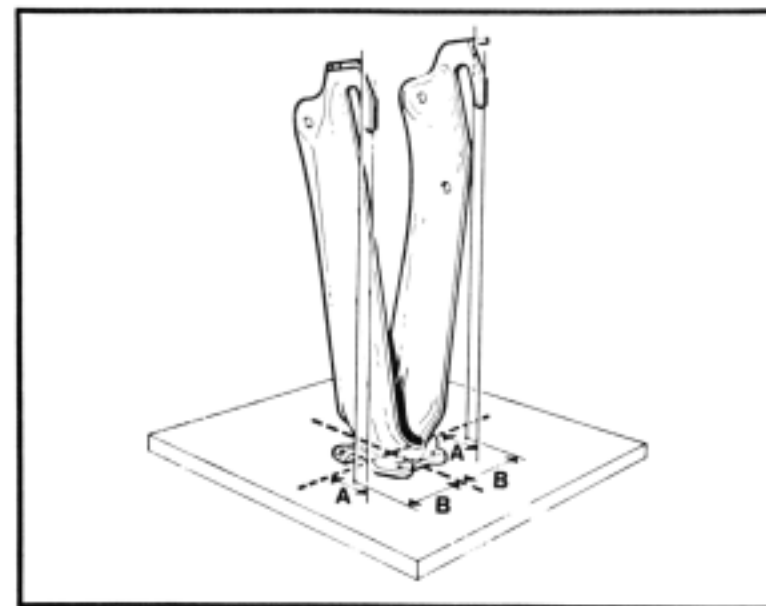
Making an alignment check on a Puch swing arm. The same technique can be used with other makes.
